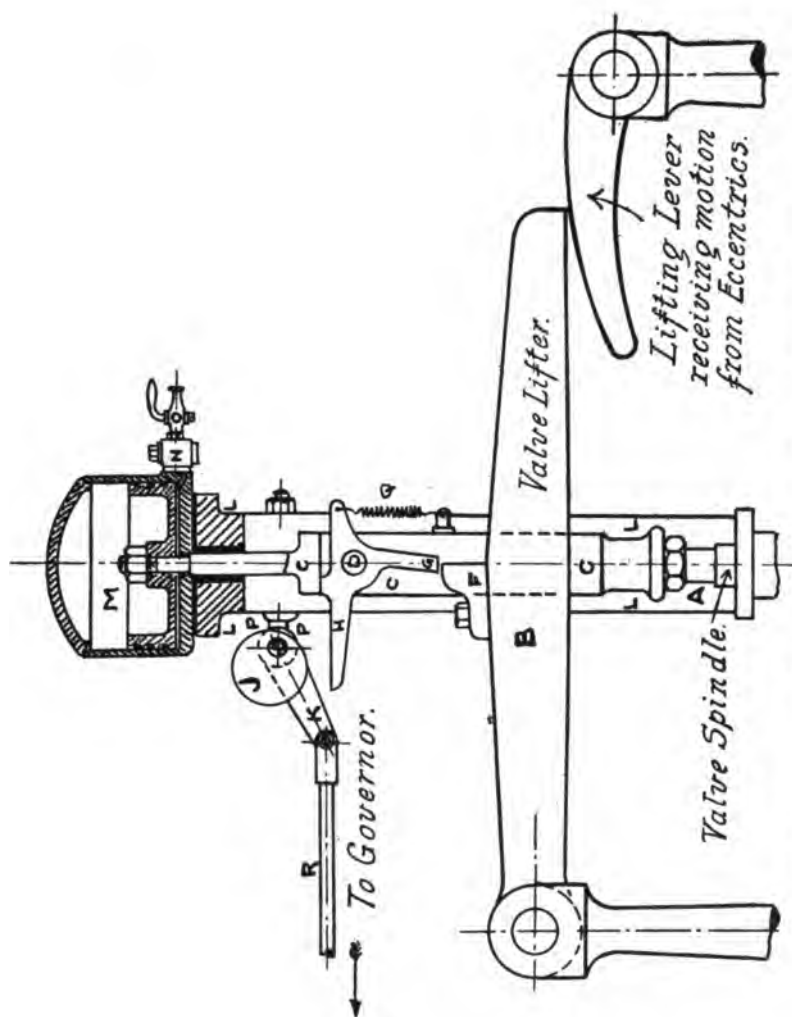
ILLUSTRATING THE MECHANISM OF AUTOMATIC EXPANSION GEAR FOR WINDING ENGINES.
